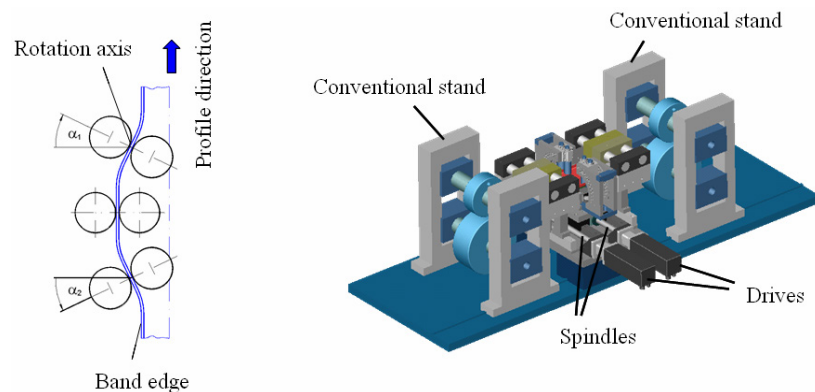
Position of the forming rolls (left), layout of forming stand for the flexible roll forming (right)
